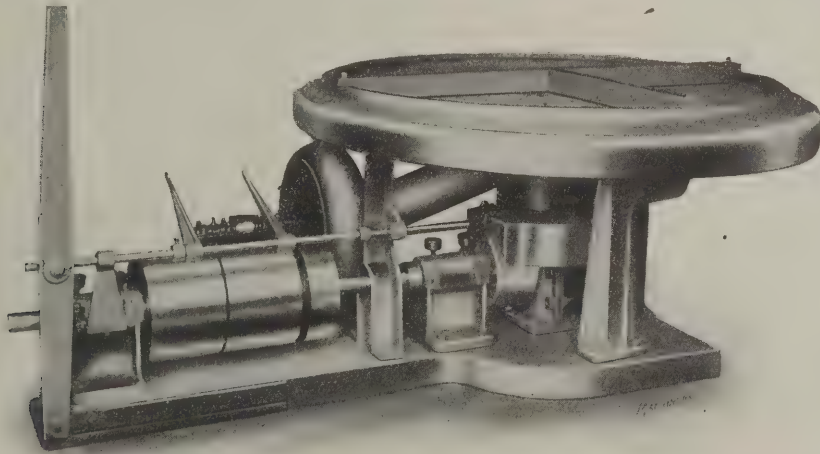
Besly 53-inch Vertical-spindle Disk Grinder
